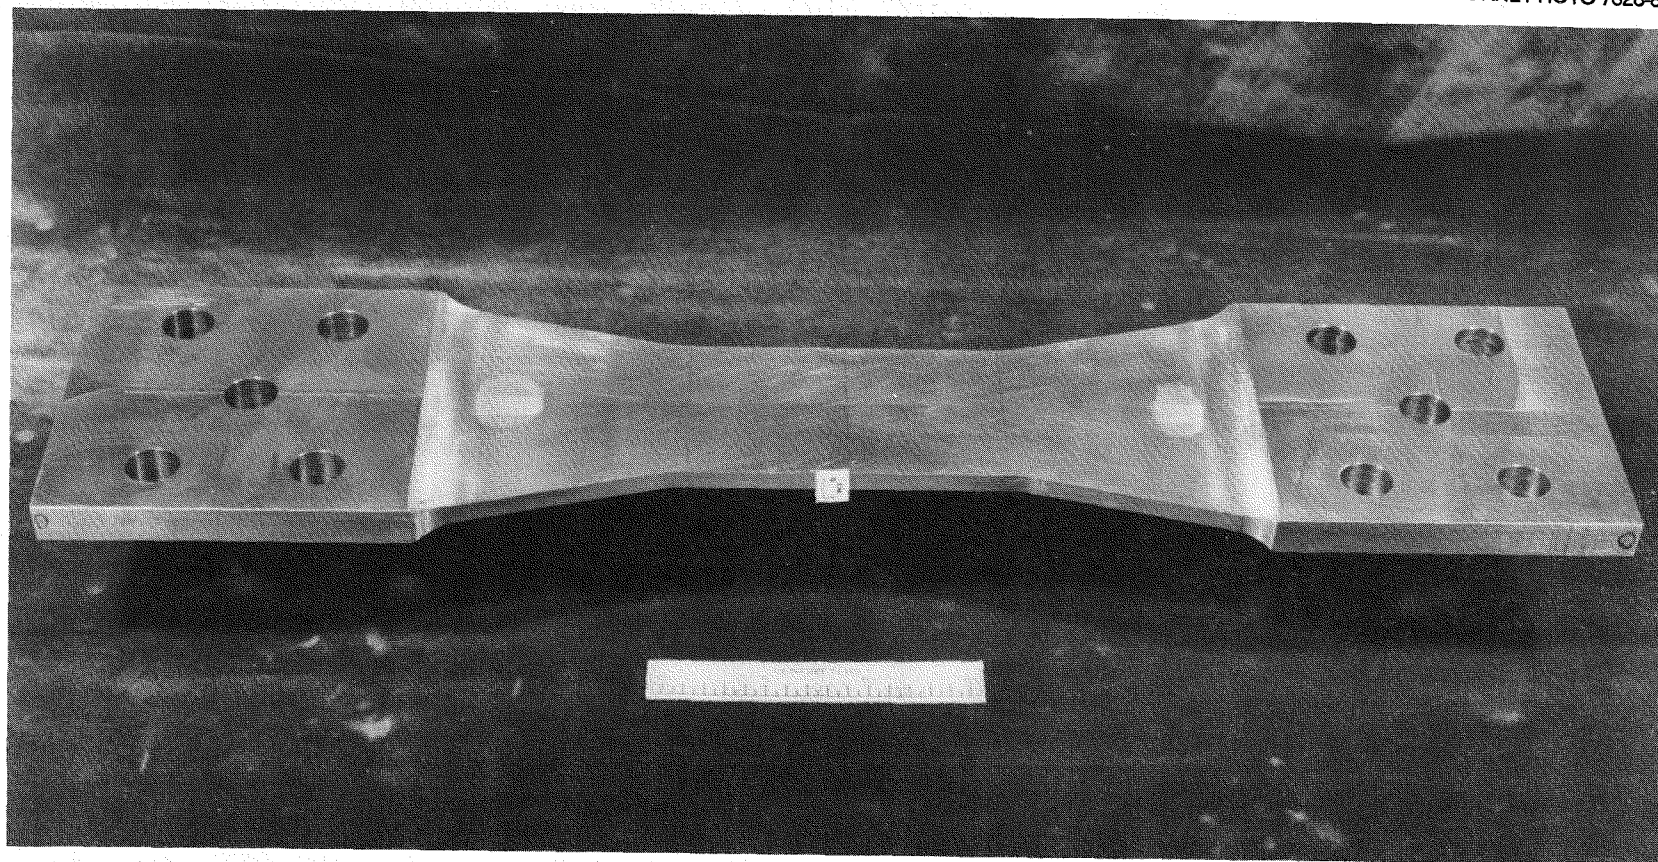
Photograph of the welded plate creep test specimen (WPCT-5).
